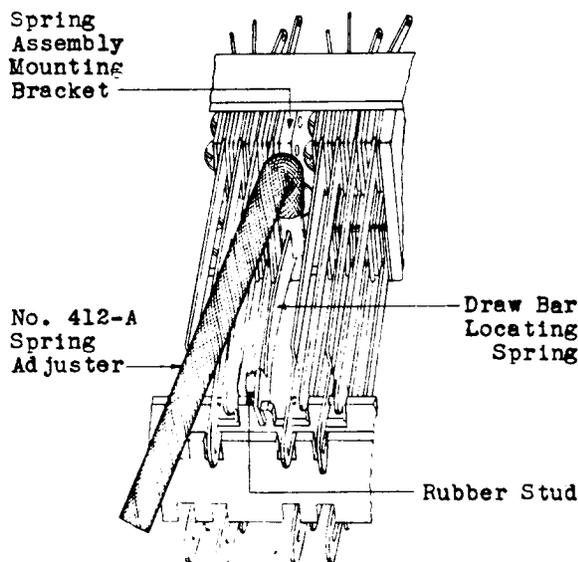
Method of Tensioning Draw Bar Locating Spring
